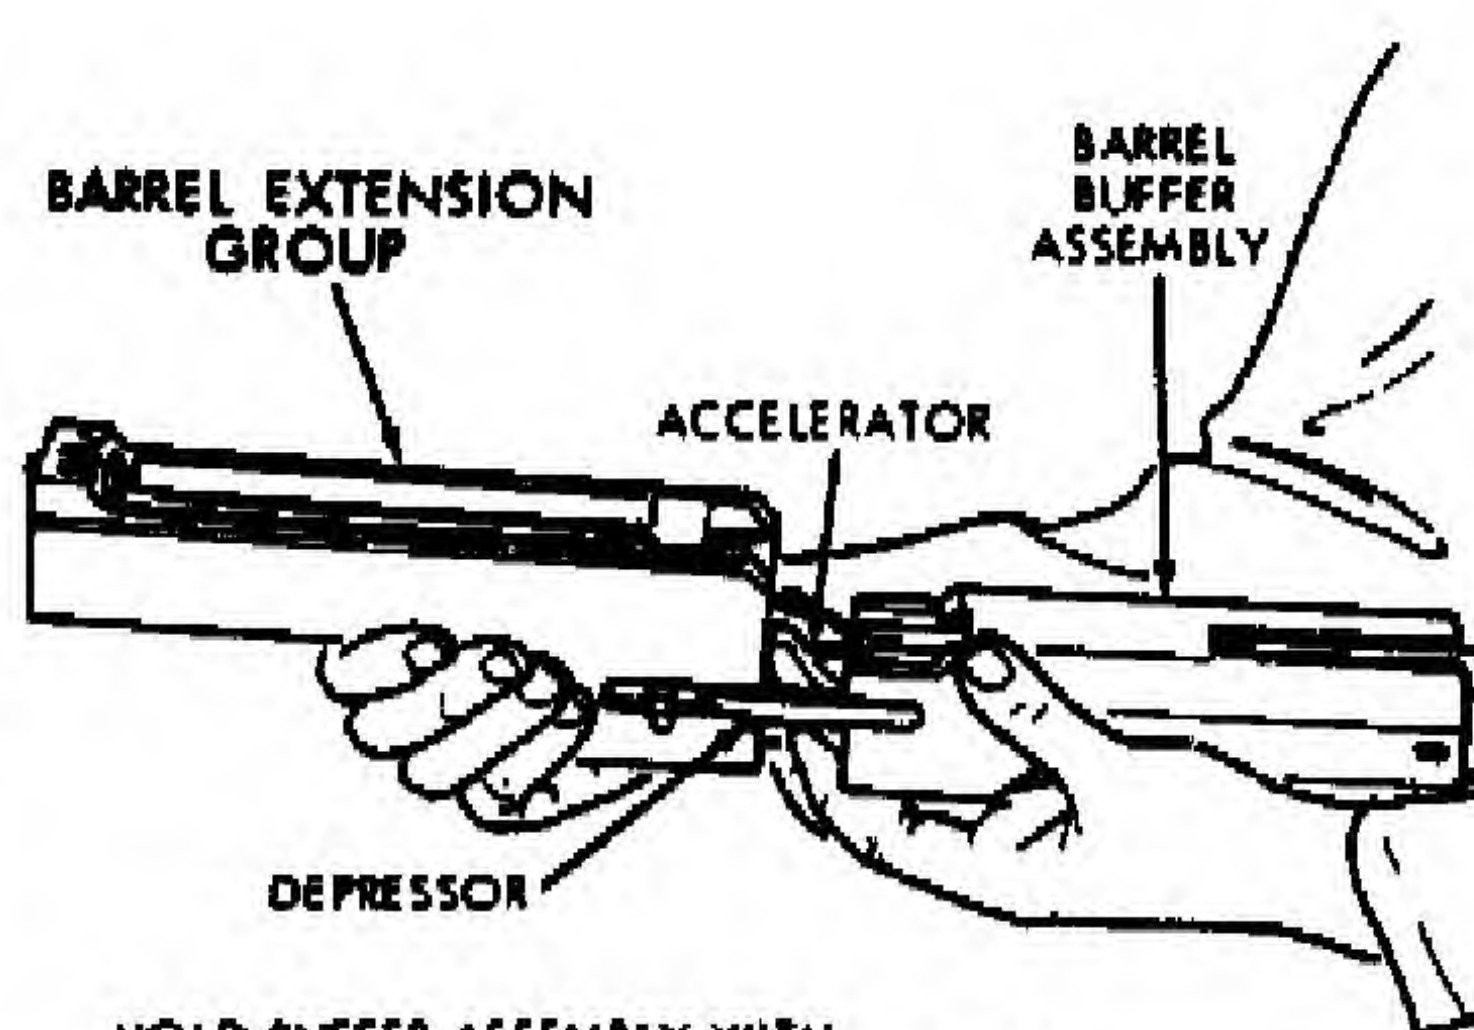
Disassembly/assembly of Caliber .50 Machine Gun, M2. (13 of 20)
